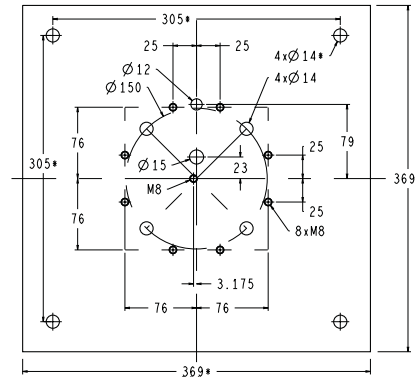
Junction Box Mounting Plate and Boom Mounting Plate
